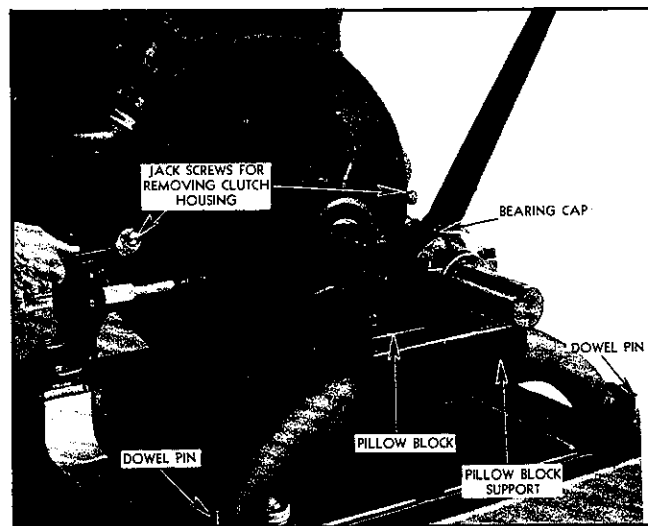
Removing Clutch Housing from Flywheel Housing.
